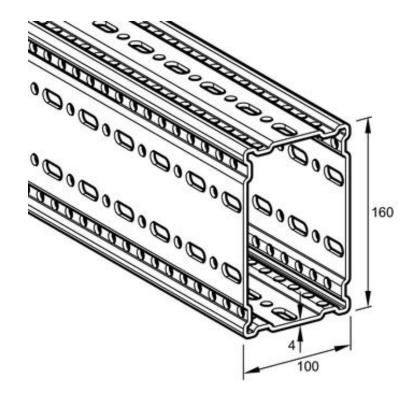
beam profile TP F 100_160 - used for main beams and cantilevers in this project (source: sikla.at)
